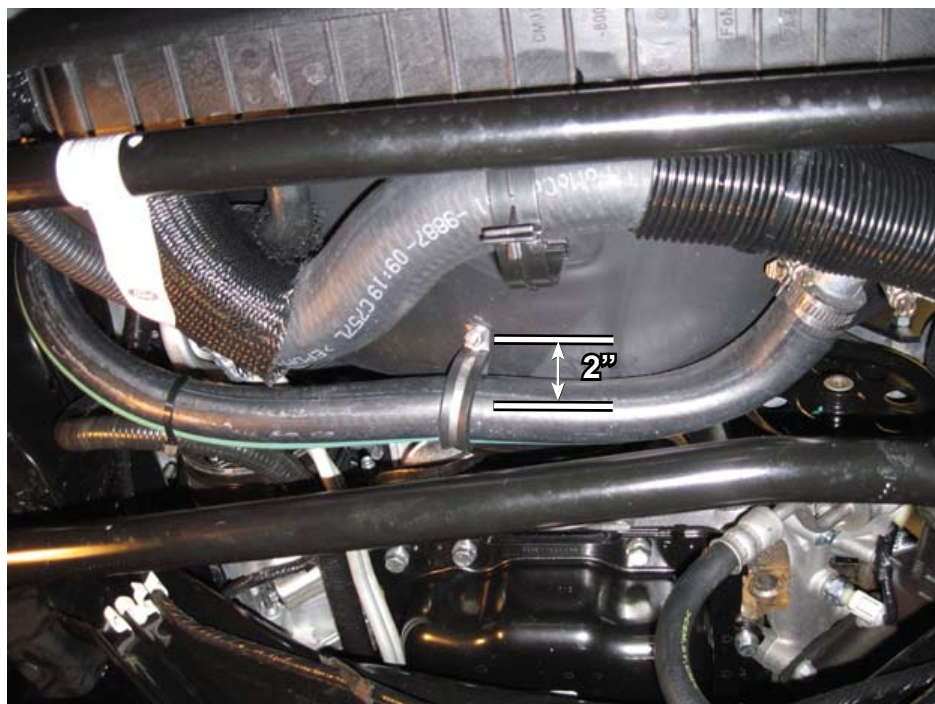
Drill 3/16" Hole Approximately 2" Back from Inside Edge of Fan Shroud
